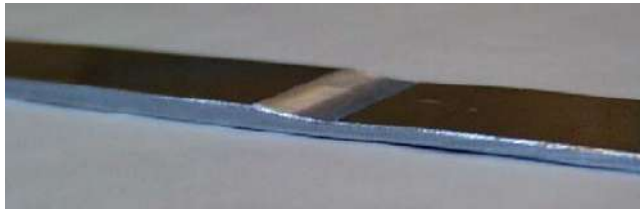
A component of friction stir tailored welded blank [36].
